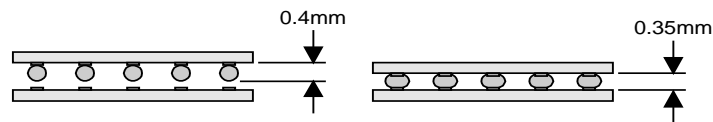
Solder Joints Using a) SMD Pads and b) NSMD Pads
